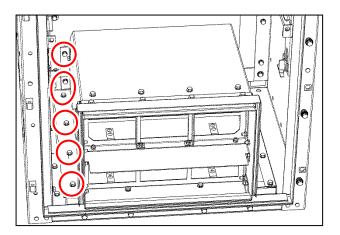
6 bolted joints fixed laterally on base frame and partition
